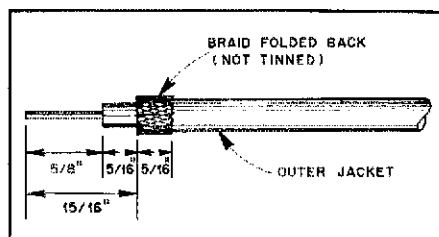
Cable prepared for connector mounting per KG6QY's suggestion.
